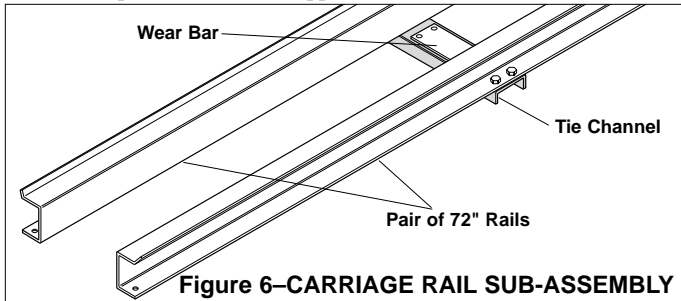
CARRIAGE RAIL SUB-ASSEMBLY
